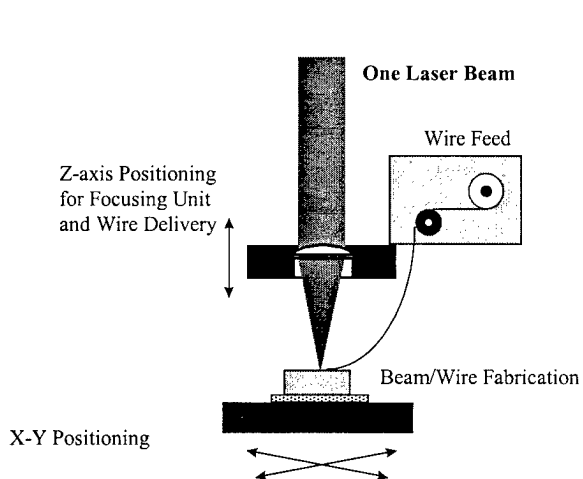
Schematic of the prototype WireFeed system showing laser perpendicular to substrate and wire feed from side.
